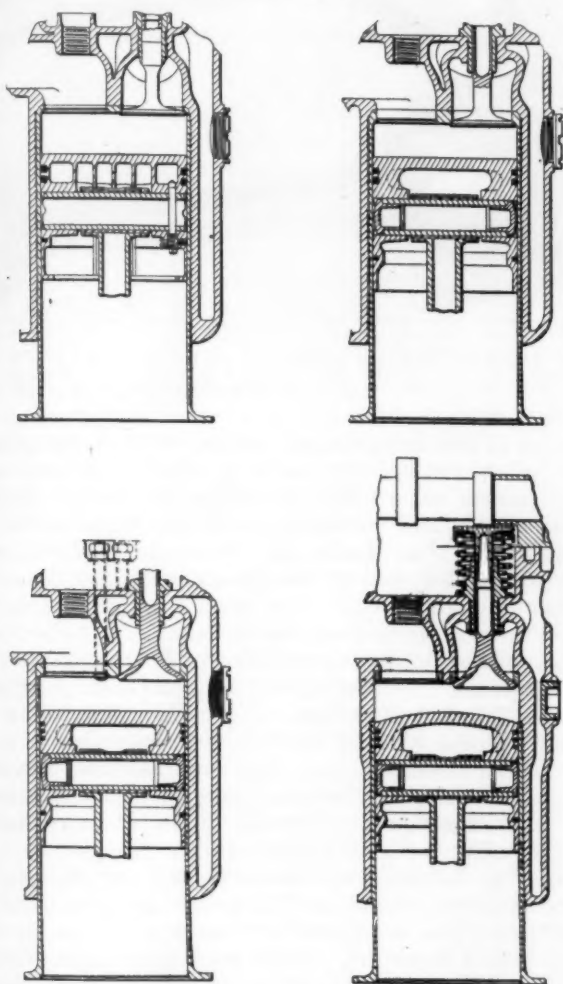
CROSS-SECTION SHOWING THE CYLINDER DEVELOPMENT IN THE WRIGHT AIRCRAFT ENGINE
